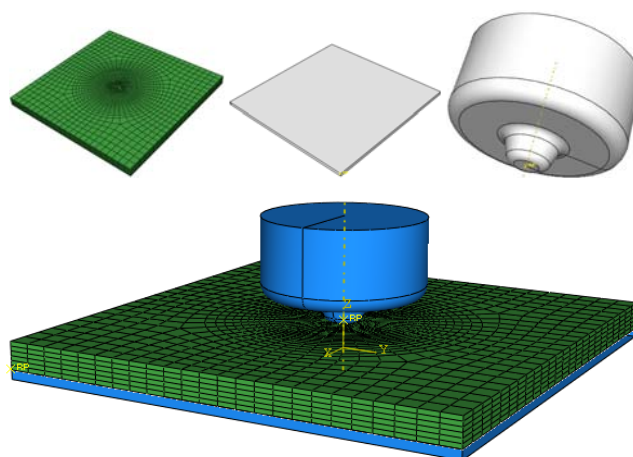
Numerical model of welding plate, tool and backing plate.
